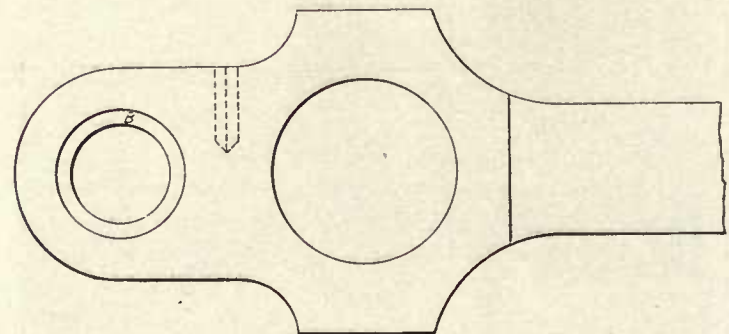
End of Eccentric Blade Repaired by Oxy-Acetylene Welding.
